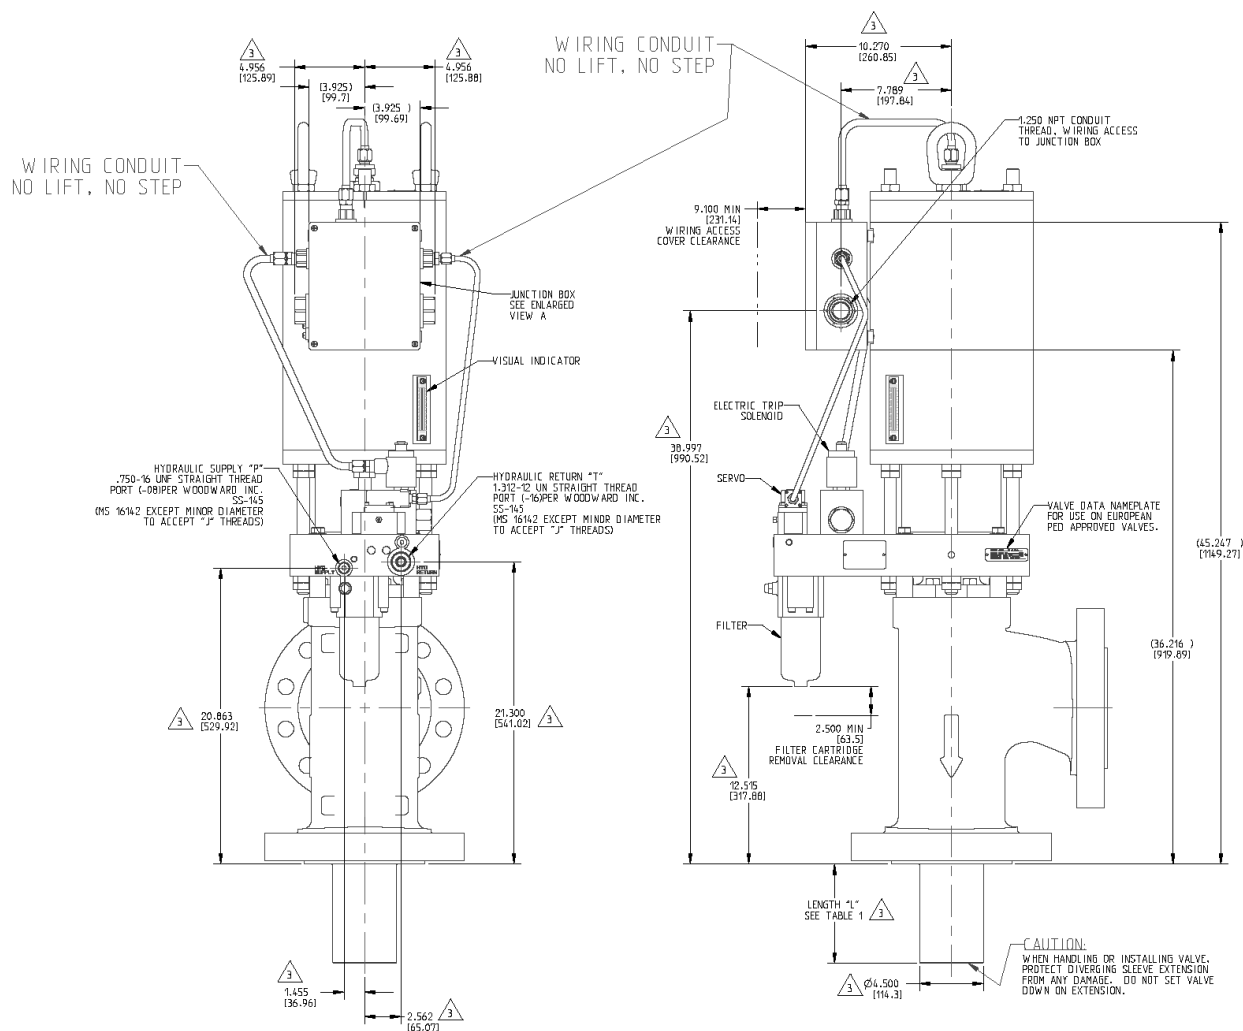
Outline Drawing 6" High Recovery Control Valve (Left View)
